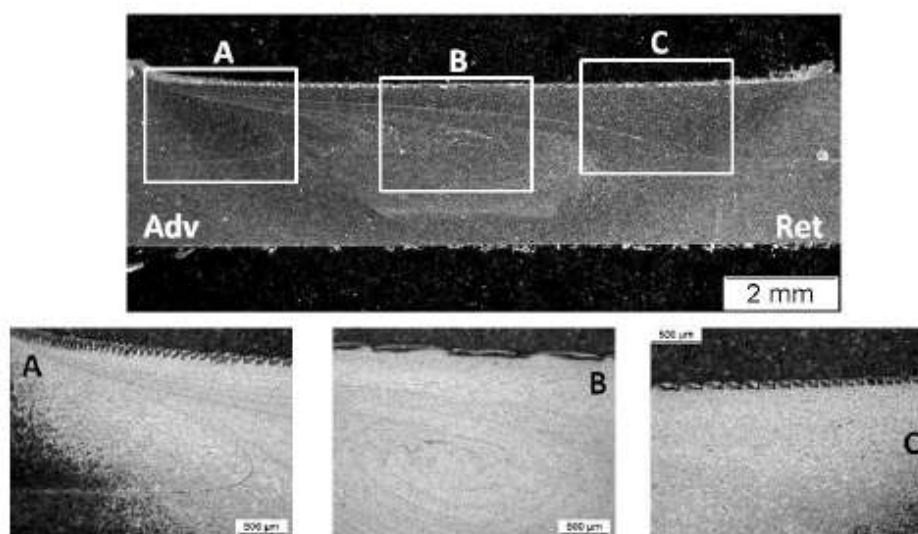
Cross-section of FSW lap joint performed with a threaded - 2,5 mm long probe tool at 1500 rpm - 150 mm/min.
